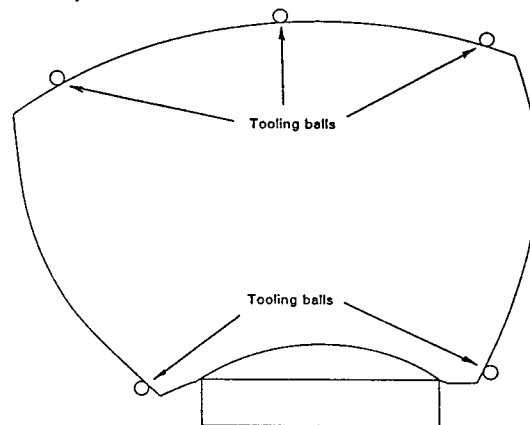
PROPELLER BLADE CASTING WITH TOOLING BALLS
